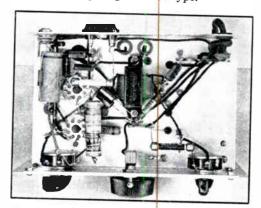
CHASSIS LAYOUT OF THE FOUR-TUBE RE-
